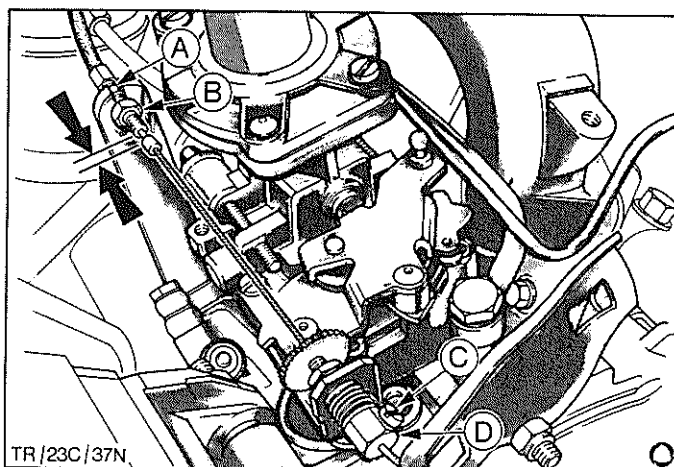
Adjust cable until a gap of 2 to 3 mm between ferrule and cable end adjuster is maintained (Bosch).
